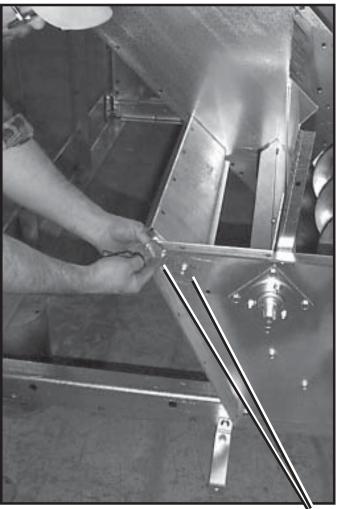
Loosely bolt front connector sheet through (2) top holes in (front) bottom auger bearing plate.
